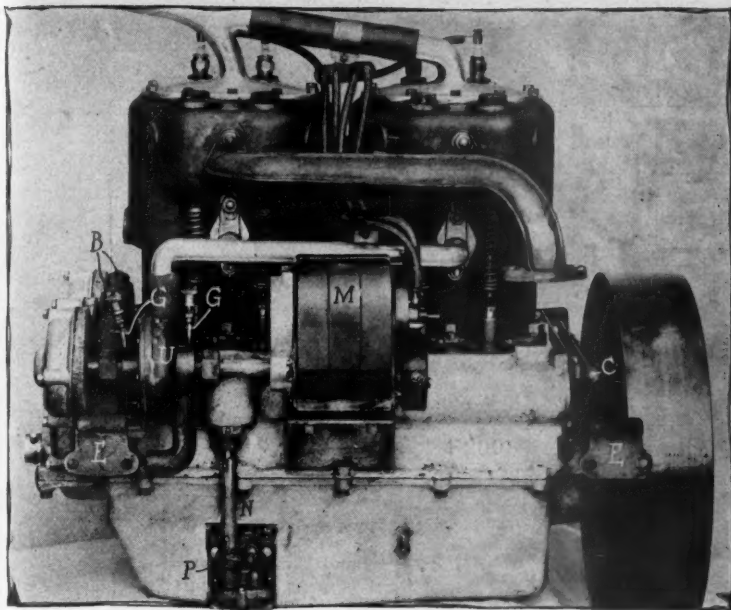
MAGNETO SIDE OF MOON MODEL 30
